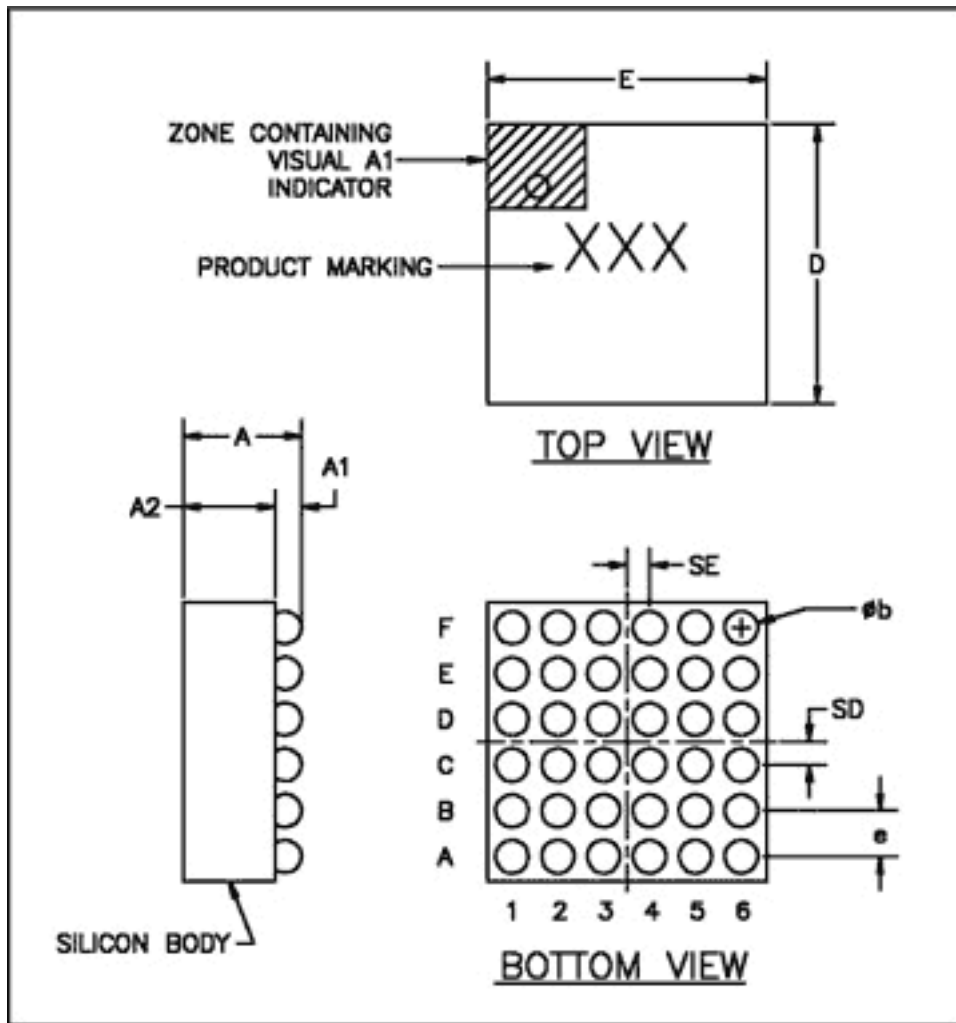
Symbol conventions for UCSP package outline drawing, full 6x6 array
